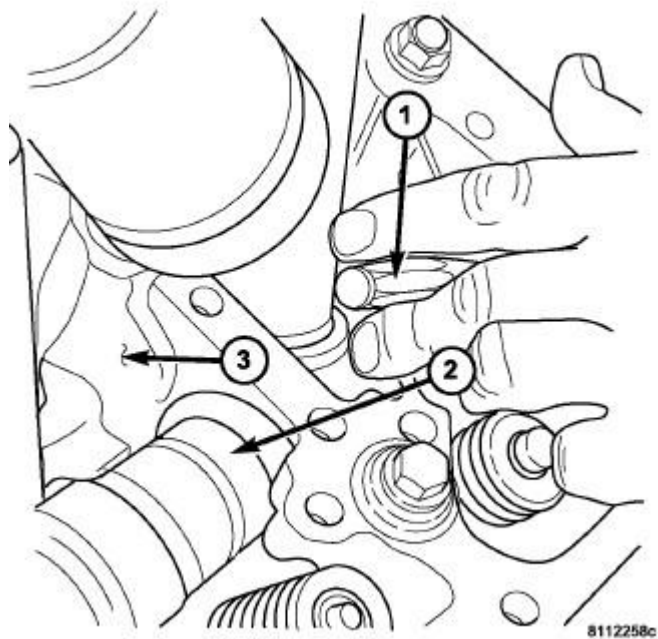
CAMSHAFT SEAL REMOVAL - LEFT CYLINDER HEAD
